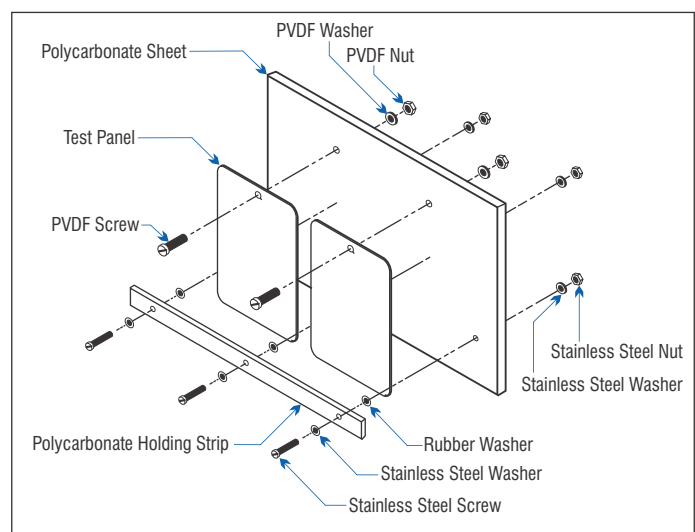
Exploded assembly view of the basic panel mounting concept, for two adjacent panels.
